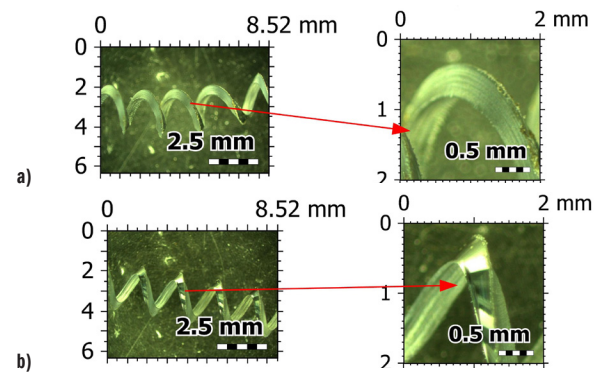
Cutting chip morphology; shape; a) chip profile of the T1 tool under non-lubricated conditions; and b) chip profile of the T4 tool under lubricated conditions (all units in mm)
